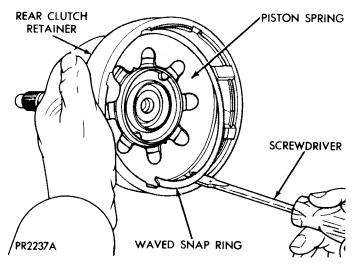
Remove or Install Piston Spring Waved Snap Ring
